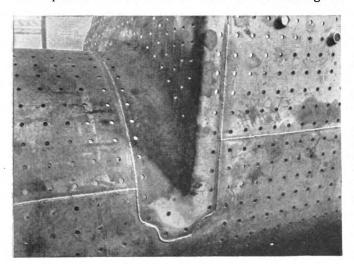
Firebox completely welded, ready for assembling in the shell of the boiler-
